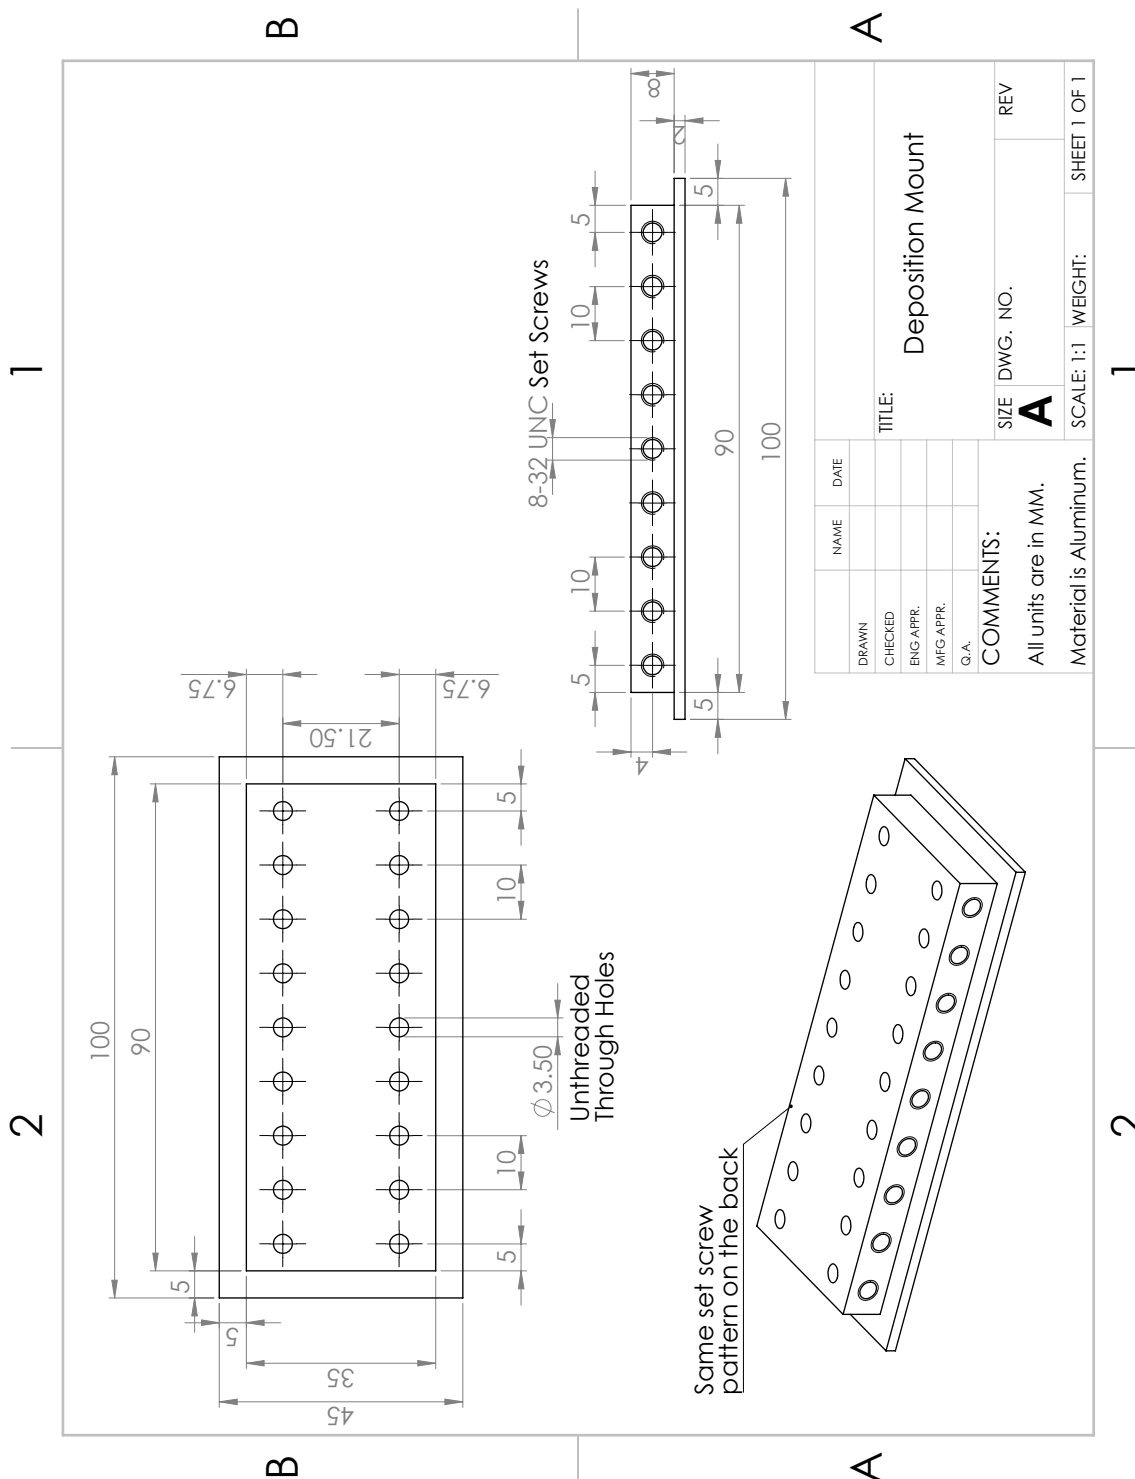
Mechanical drawing for the mount utilized to hold the milled SEM stubs containing the individual samples in the magnetron sputtering system.
